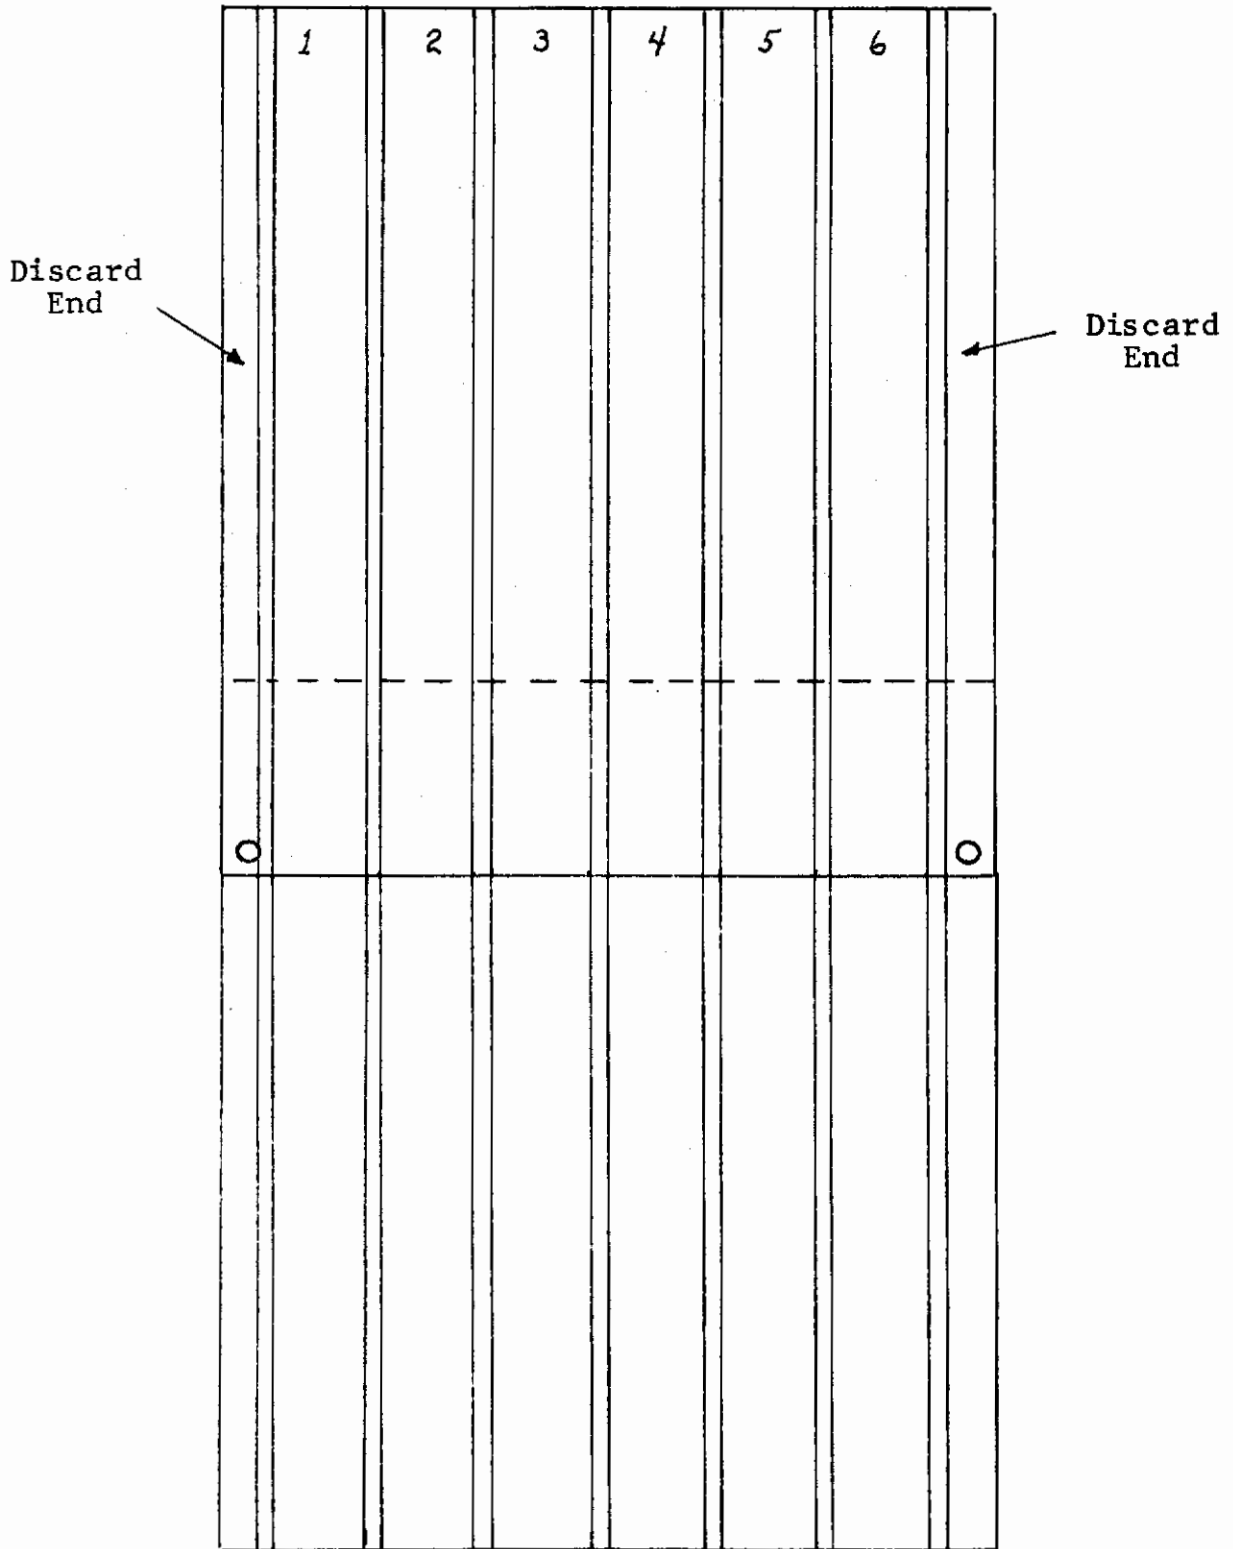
SECTIONED DOUBLE LAP JOINT BONDED PANEL
